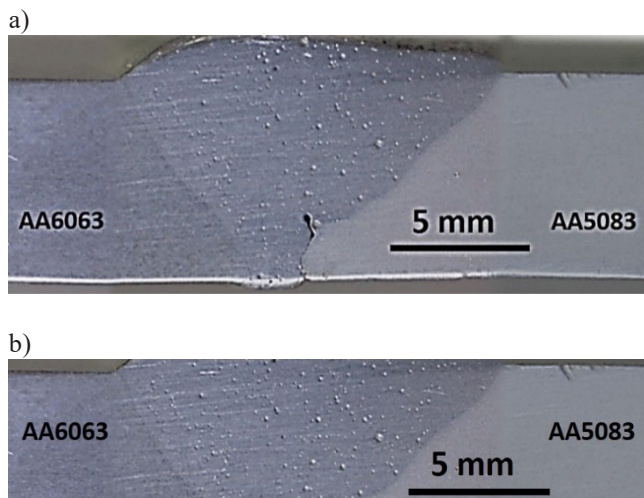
Macrostructure of the weld joint: a) before cutting, b) after cutting for removing geometrical defects
